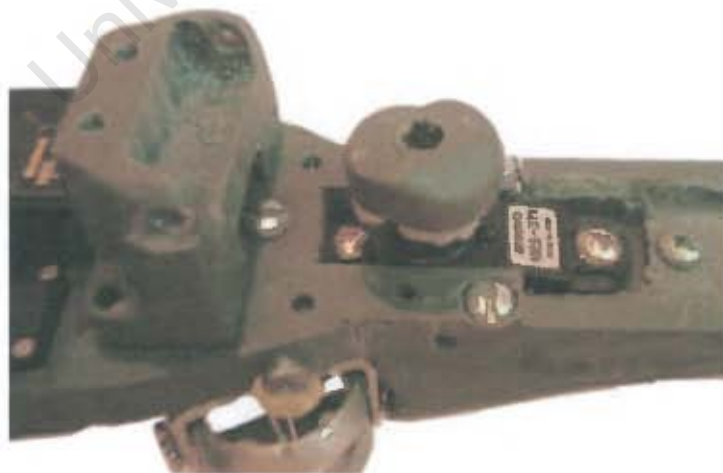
Bottom view of mouth mechanism with lower jaw removed, showing helical cam attached to mini servo
